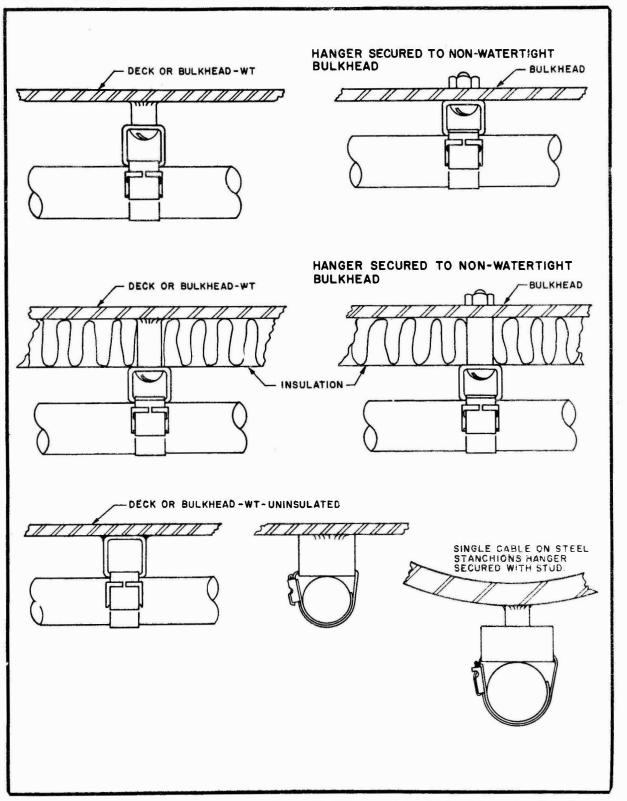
Single Cables on Steel or Aluminum Decks and Bulkheads, and on Steel Stanchions 4-7-2
